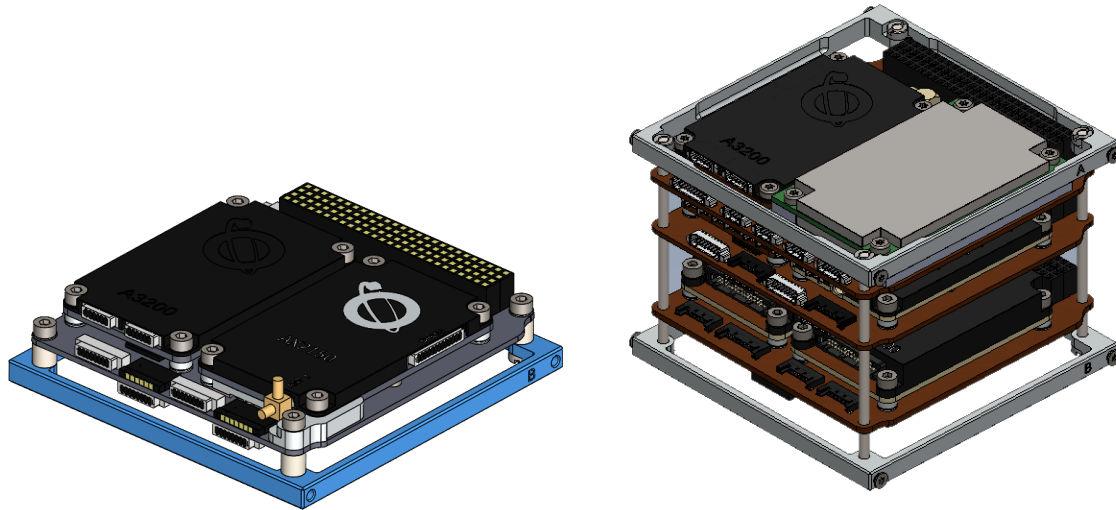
GomSpace Ring Assemblies Examples – Left: Single Ring, Right: Dual Ring
